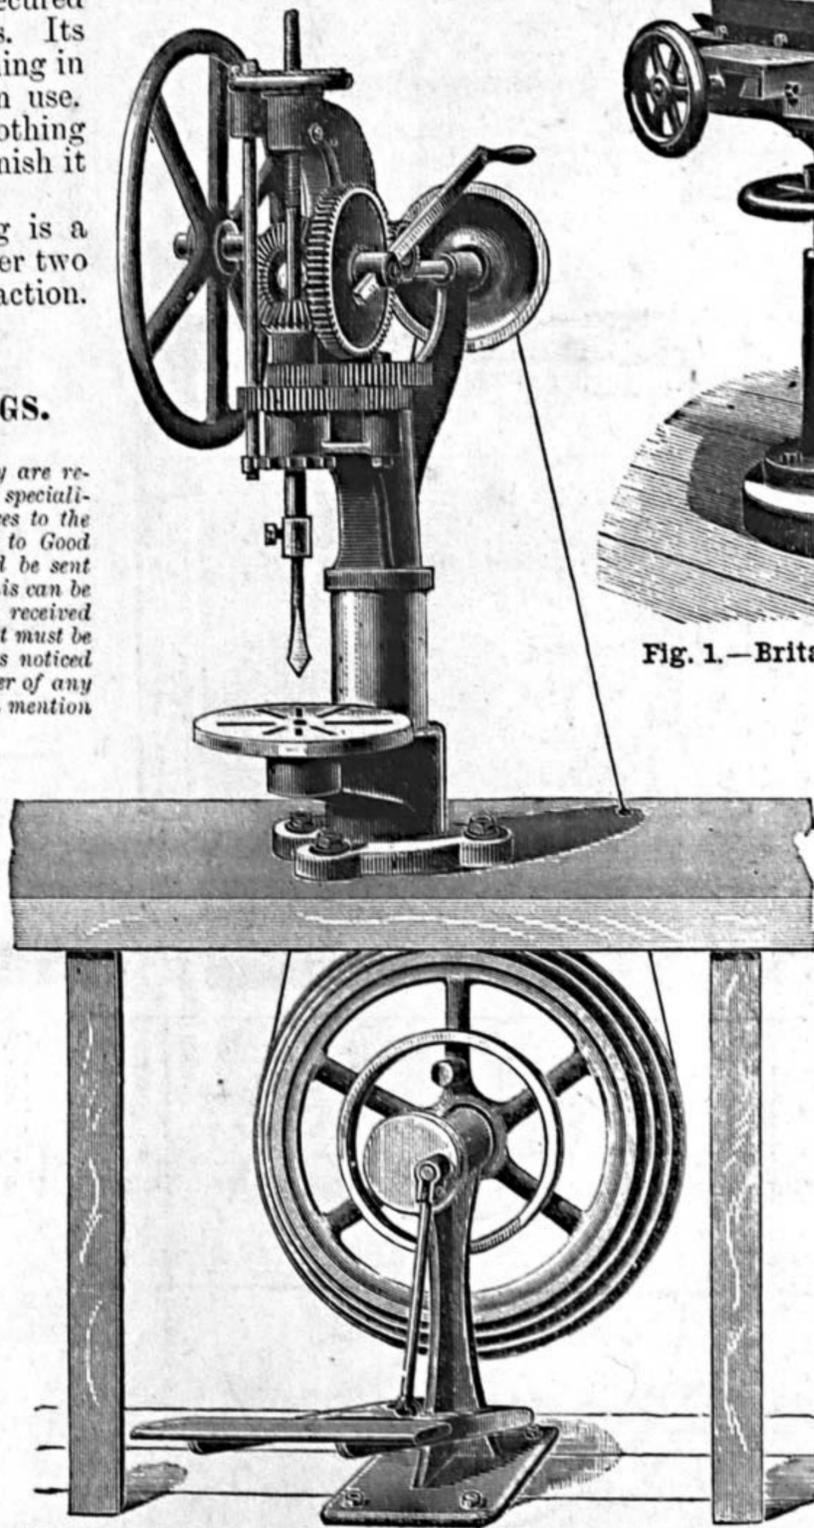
Britannia Company's No. 5 Bench Drilling Machine.
